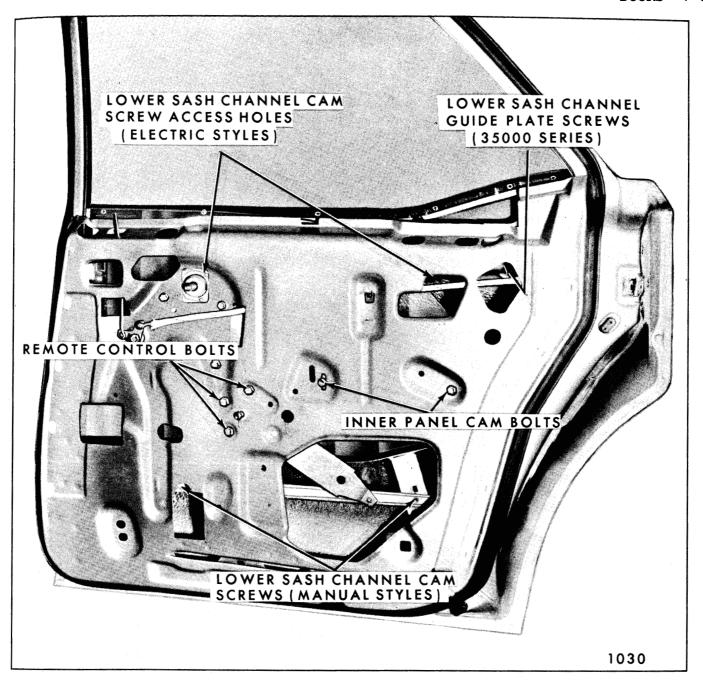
Rear Door Hardware Attachment - "B" Styles Shown - "A" Styles Similar
